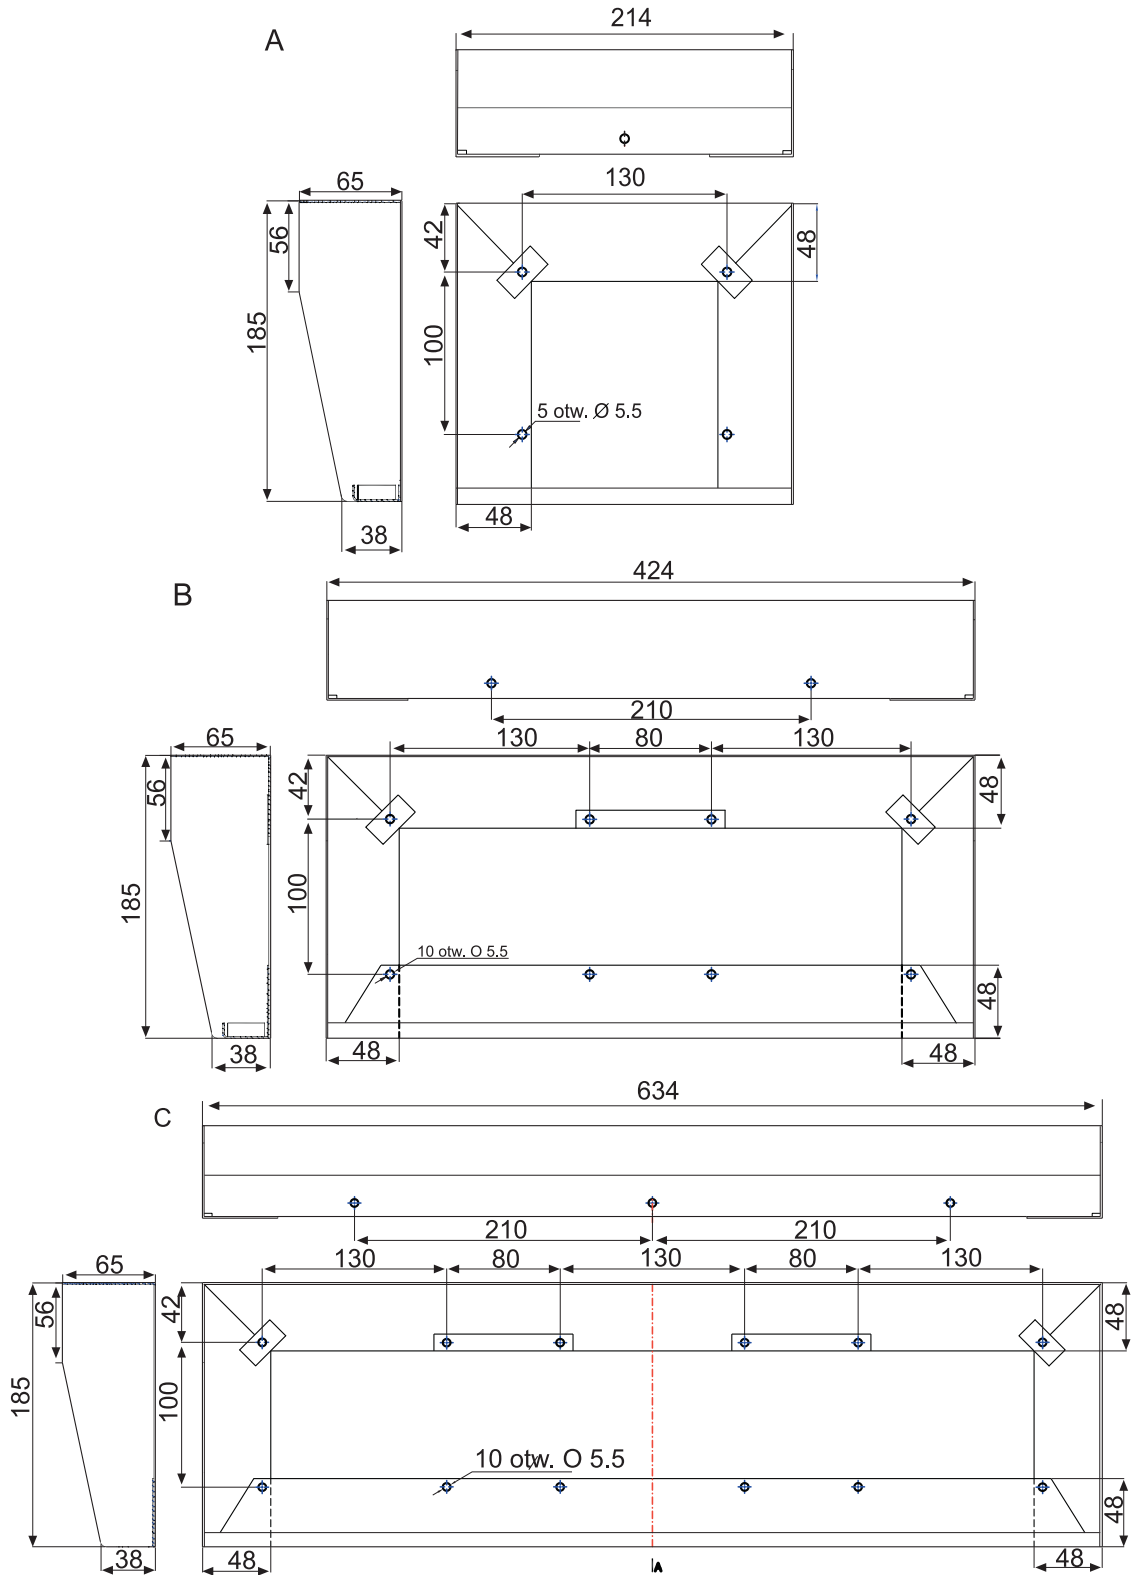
Dimensions of casings mounted on plaster in horizontal arrangement, for panels CP-3100xx
